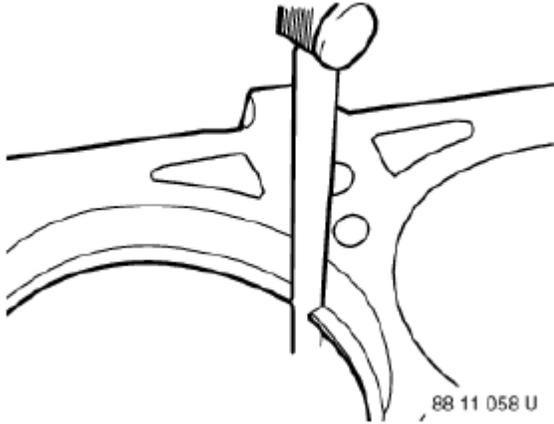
Measuring Piston Rings Contact Clearance With Feeler Gauge
